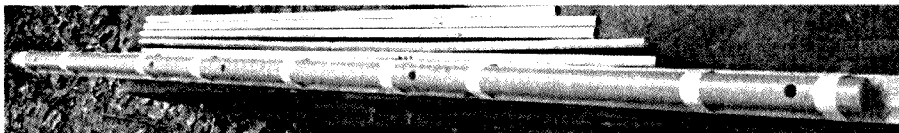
2 m Boom still taped to wood after drilling, elements cut, driven element assembled.
